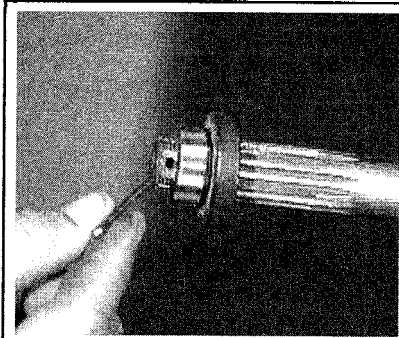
A coter pin is installed through the nut or keeper and a hole in the propeller shaft
